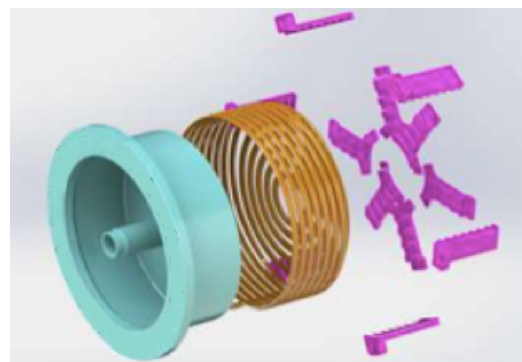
Ionizer sub-assembly of the ITT: Discharge Chamber, Coil and Coil holders are depicted
